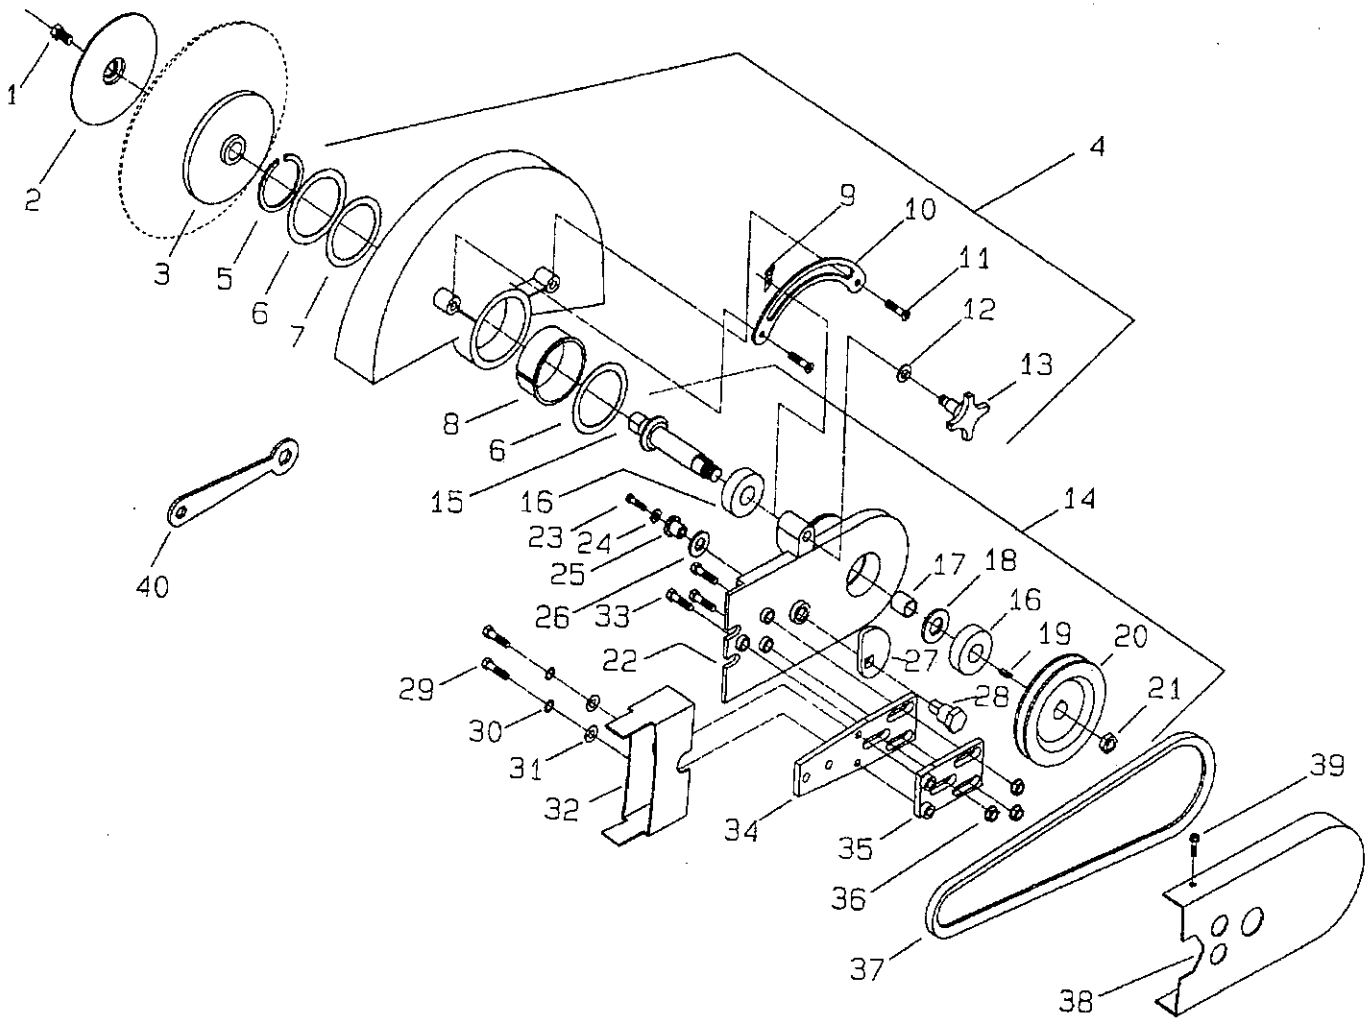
FIGURE I - PARTS LIST BLADE GUARD AND ARM ASSEMBLY
